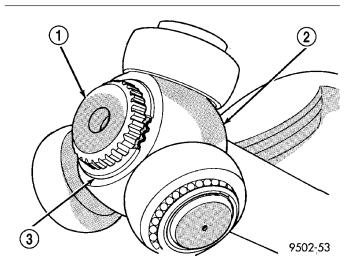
Spider Assembly Retaining Snap Ring Installed
